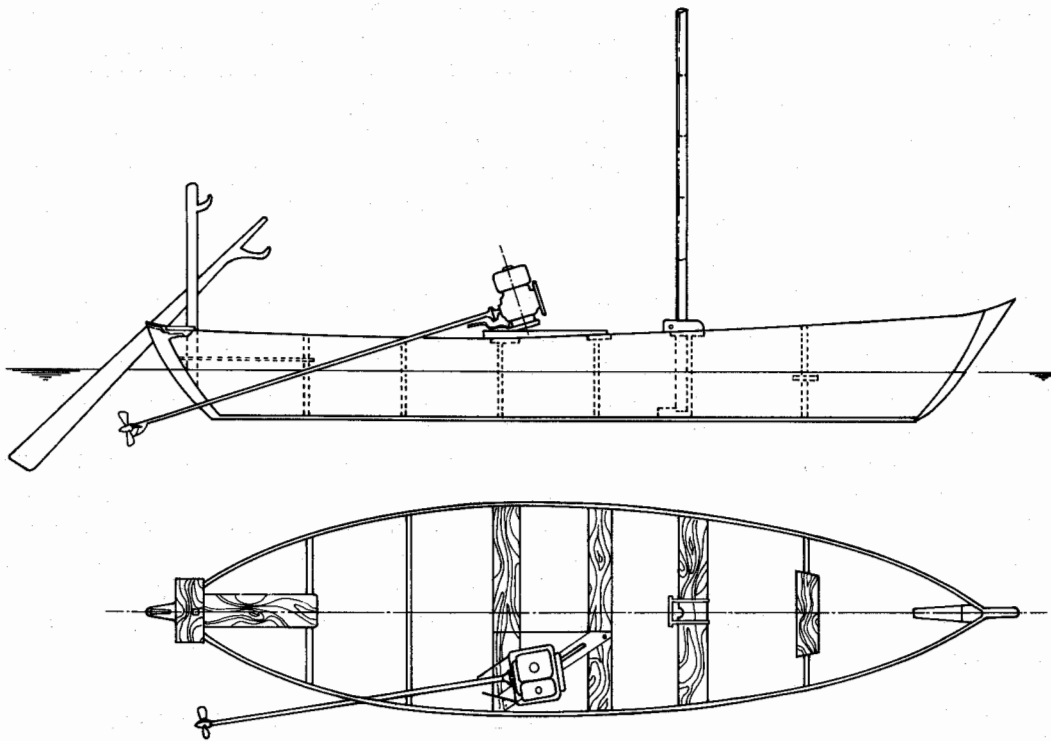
Typical small-scale boat with inboard motor and long propeller shaft.
